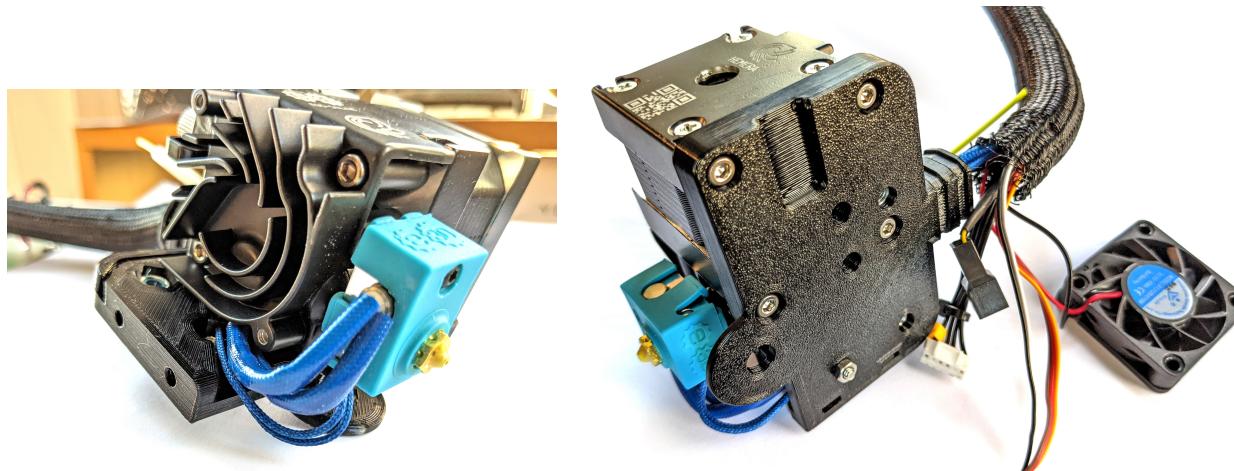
Route the thermister and heater cables into the cable channel in the mounting plate, then flip over and screw in the Hemera
